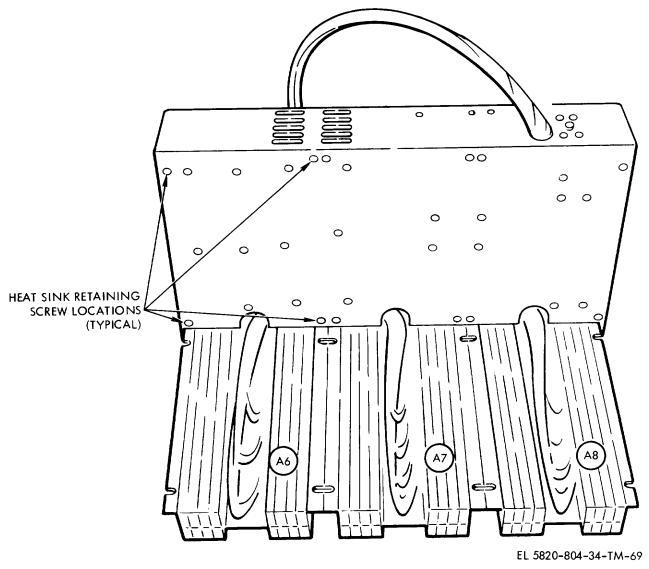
Bottom of power supply chassis with heat sinks folded out.
